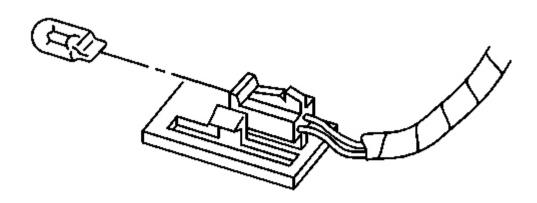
Bulb At Socket Courtesy of GENERAL MOTORS CORP.
